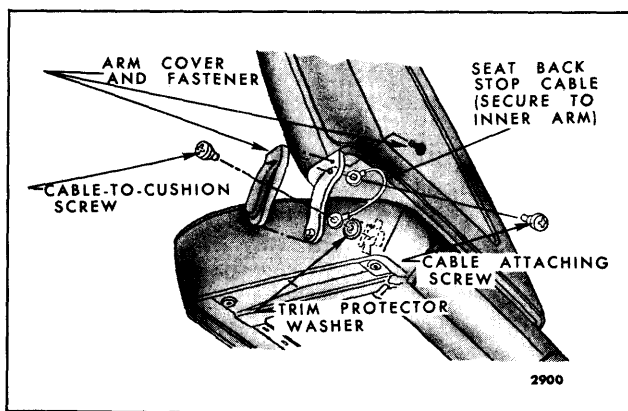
Bucket Seat Back Stop Cable—"F & Z" Styles
